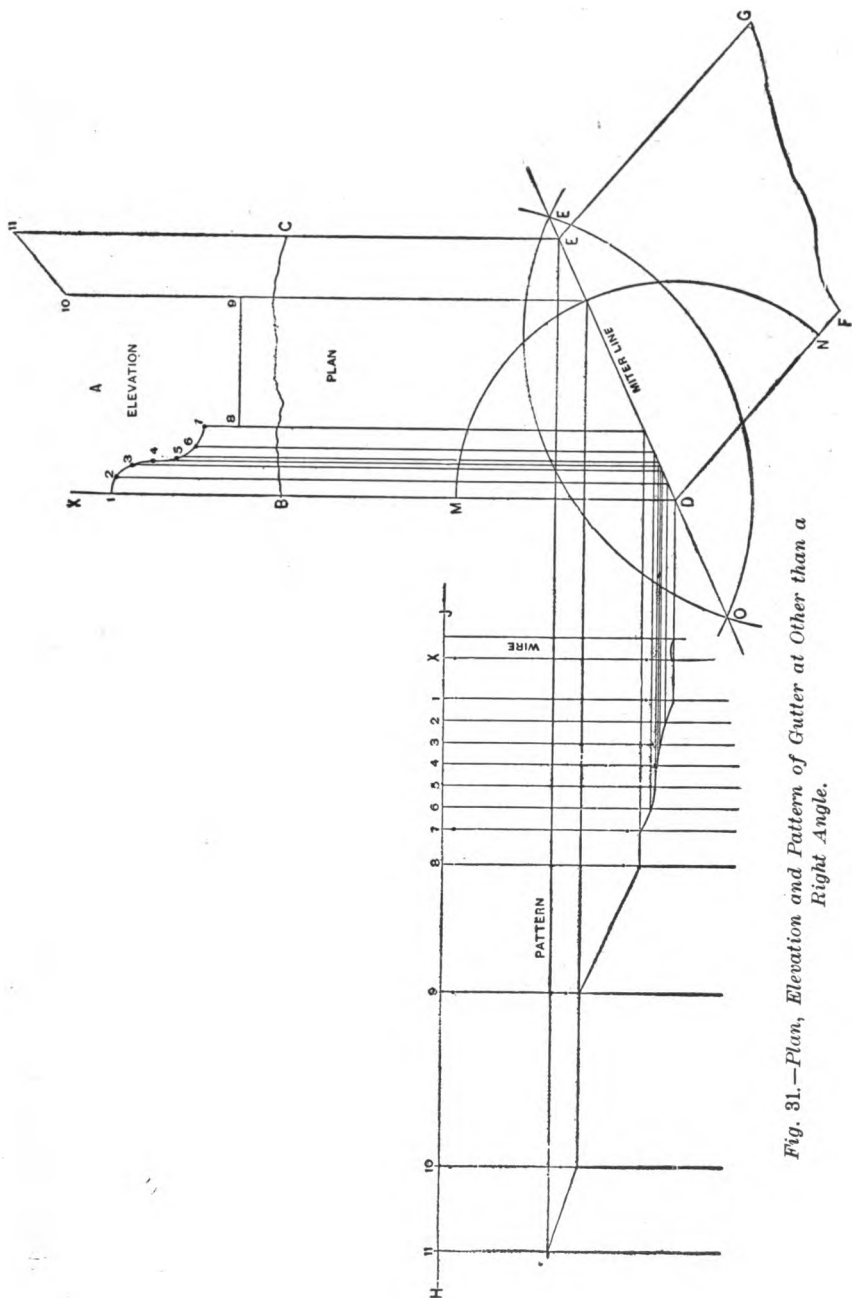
Plan, Elevation and Pattern of Gutter at Other than a Right Angle.
